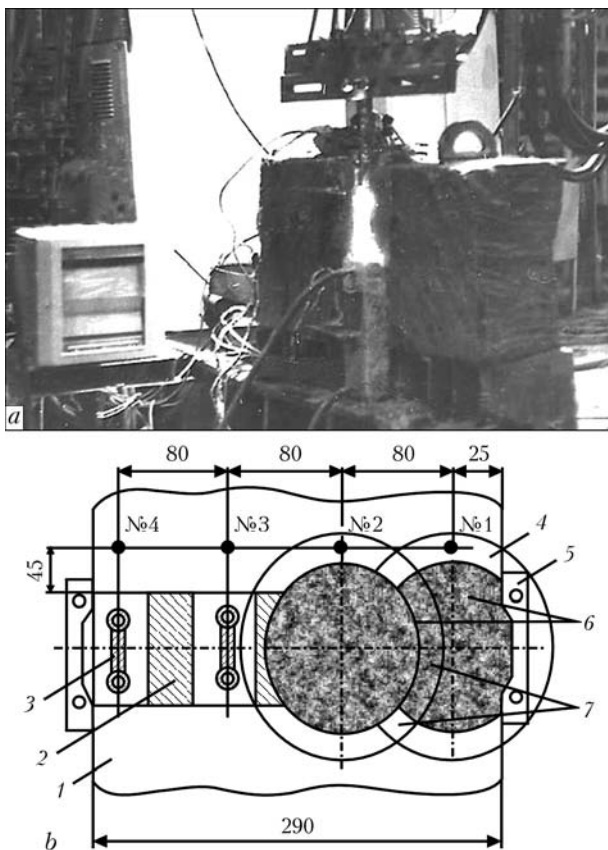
Fragment of measurement of thermal cycles of HAZ metal (a) and scheme of thermocouples arrangement in the specimen of steel 34L-ESh (b): 1 – edge being welded; 2 – forming plate; 3 – consumable nozzle; 4 – HAZ; 5 – water-cooled cover plate; 6 – layers of multi-layer electroslag weld; 7 – zones of reheating (self-heat treatment); No 1–4 are the ordinal numbers of points of thermocouples arrangement
